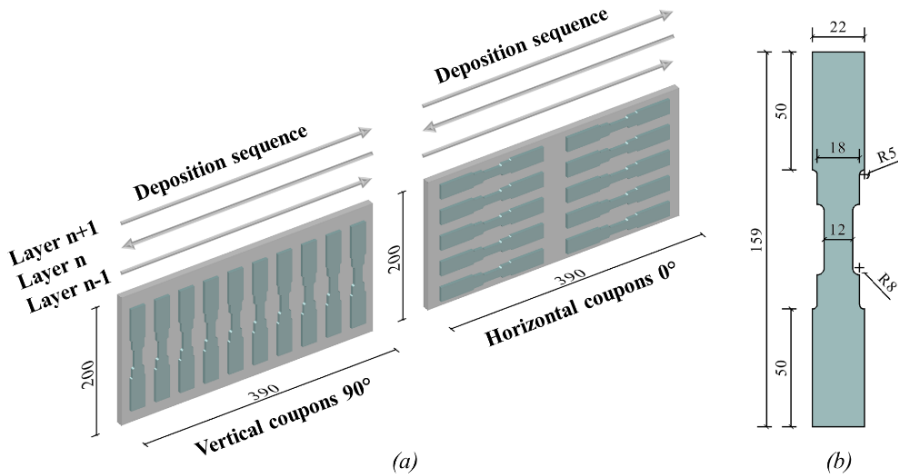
(a) Geometry and deposition strategy of the DED-Arc walls and schematic layout used for specimen extraction; (b) geometry of HCF specimens (units: millimeters)
